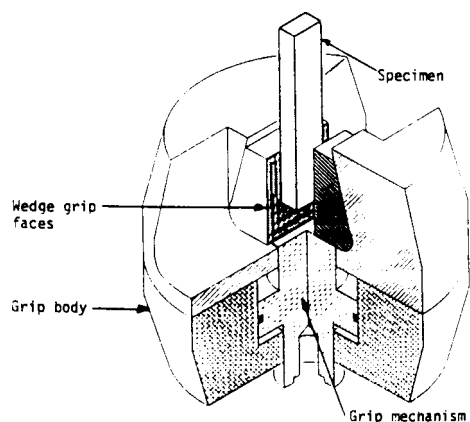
Example of a Smooth, Wedge Active Gripping System for Flat Specimens
